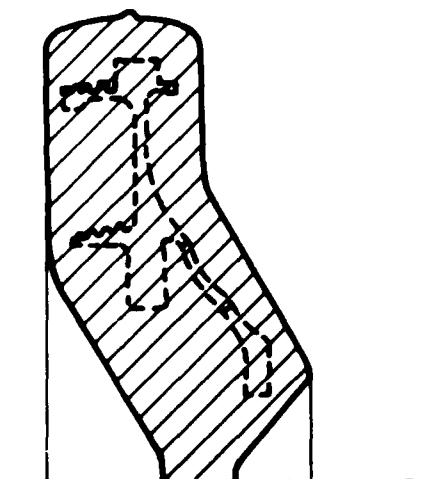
FORGING CONTOUR NORMAL SHAPE
